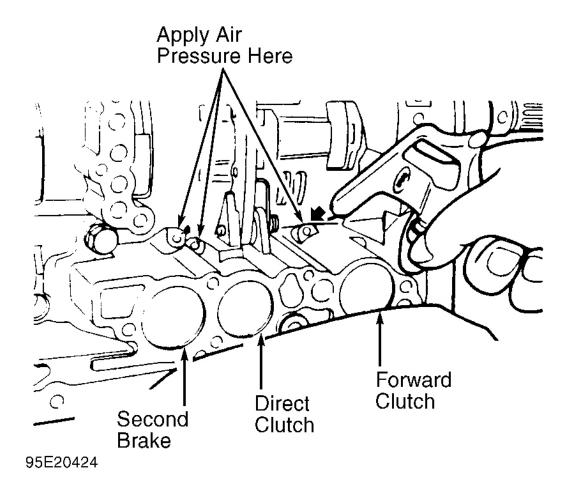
Removing Accumulator Pistons Courtesy of ISUZU MOTOR CO.
